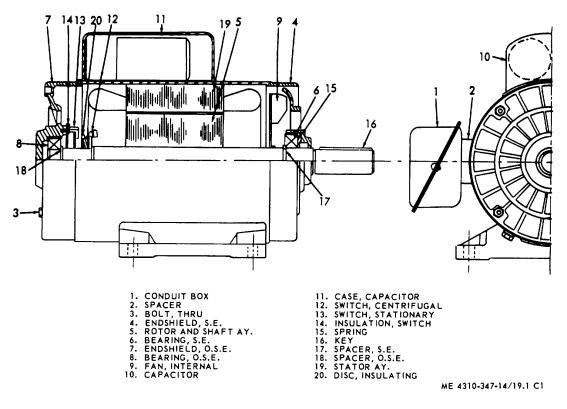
Electric motor, assembly (Serial Nos. 14433 thru 14449).
